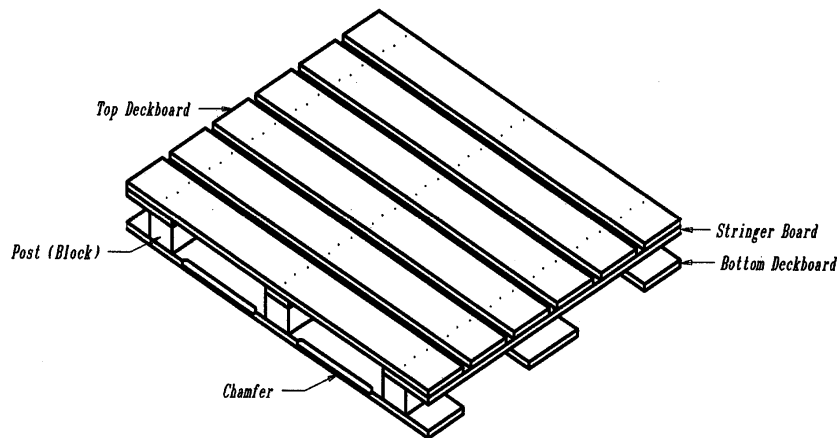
Typical View of Standard NATO 4-Way Entry, Winged Pallet
